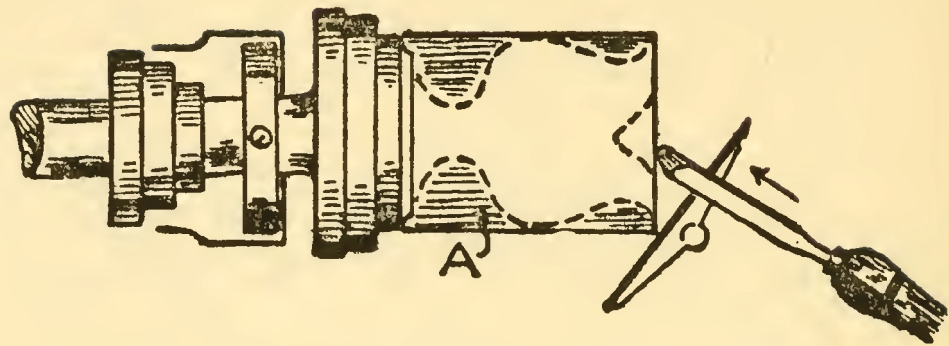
HOLLOWING A VASE. SHOWING INCLINATION OF TOOL REST TO LATHE BED.
